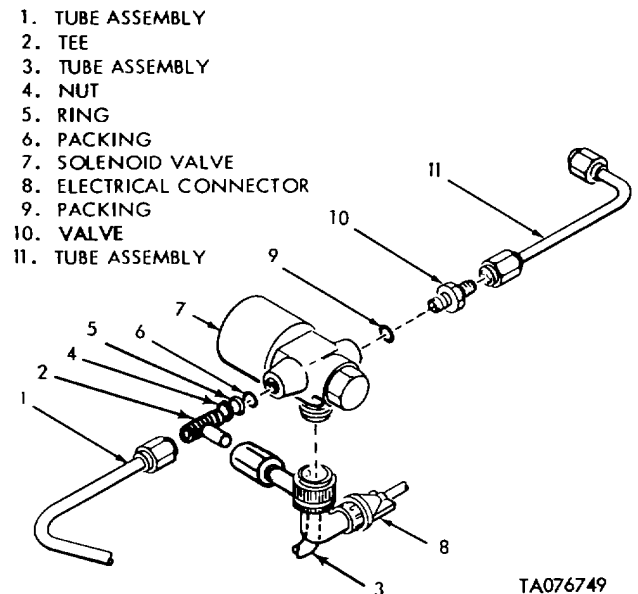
Reduced Pressure Solenoid Valve Removal
